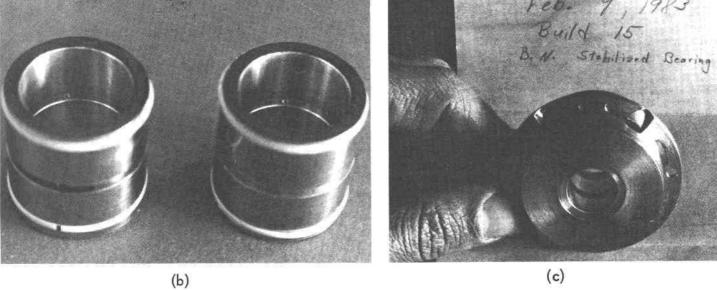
Squeeze-Film-Damped Journal Bearing (Stabilized Bearing)
